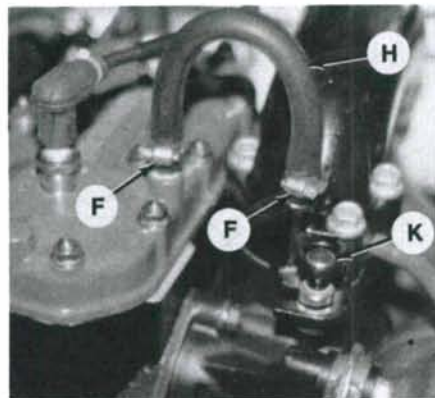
View identifies bypass hose (H) and fitting (F) on cylinder head and exhaust pipe. Knob (K) controls operation of water drain valve via a cable.
